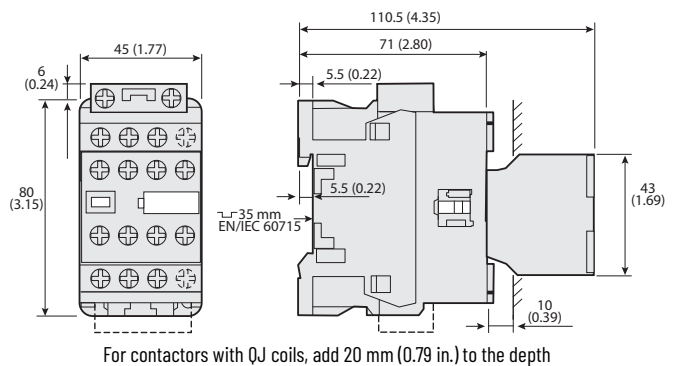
100-E09...100-E16 Contactors with Standard Coils and Front-mounted Auxiliary Contact
